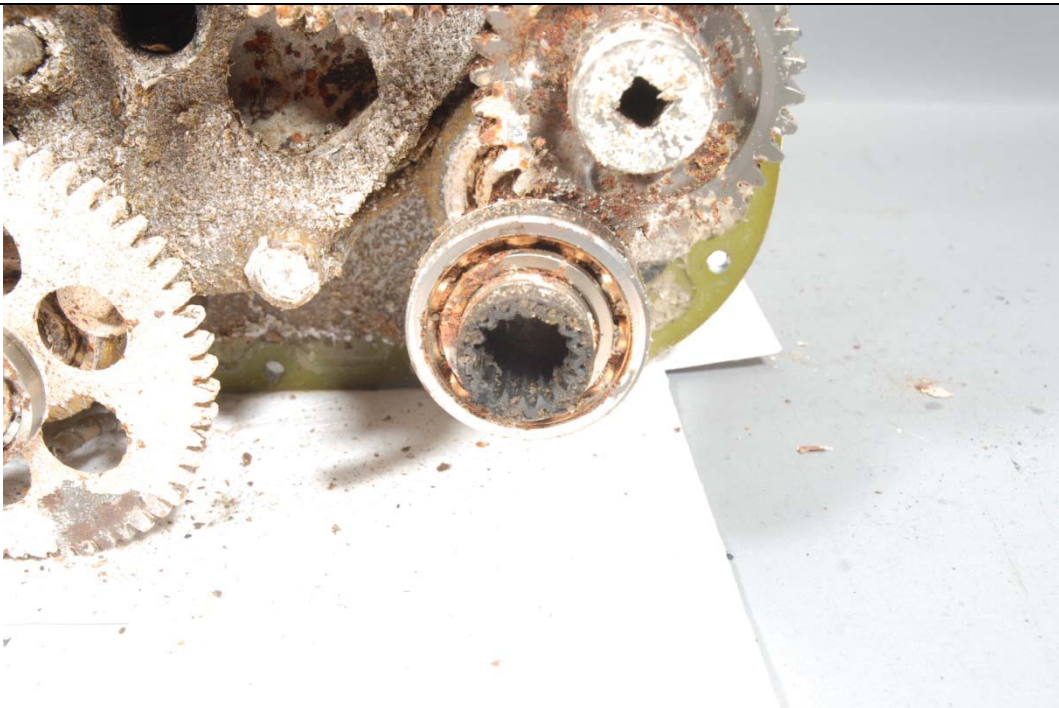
P-79001C, HSP-to-Power Section Coupling Shaft
